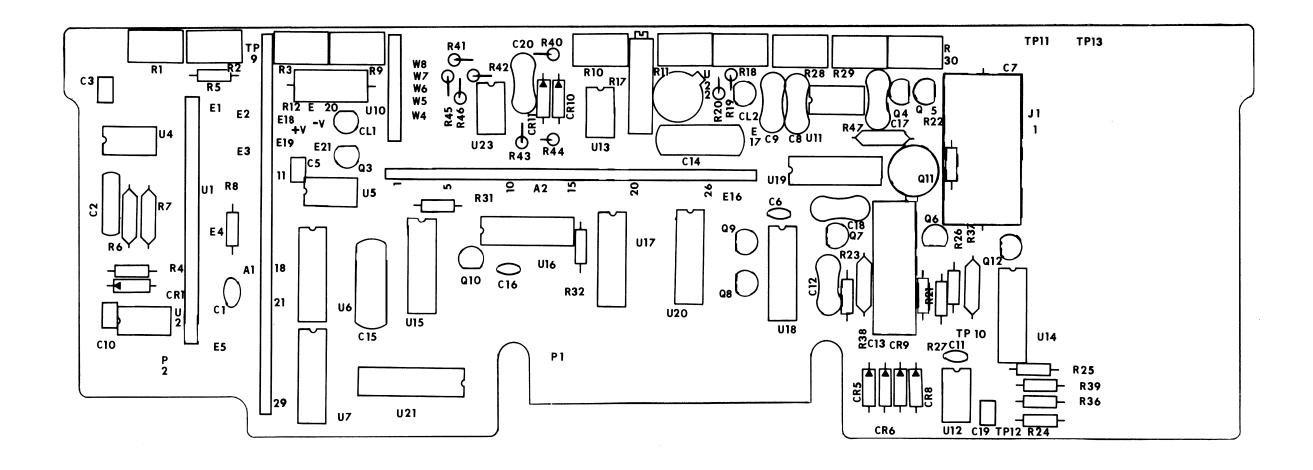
A4 AC/DC Scaling PCB Assembly (cont)
